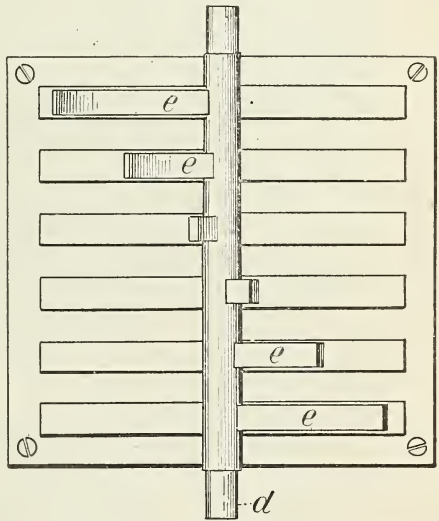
Slotted bottom of hopper used in "greif" machine.
